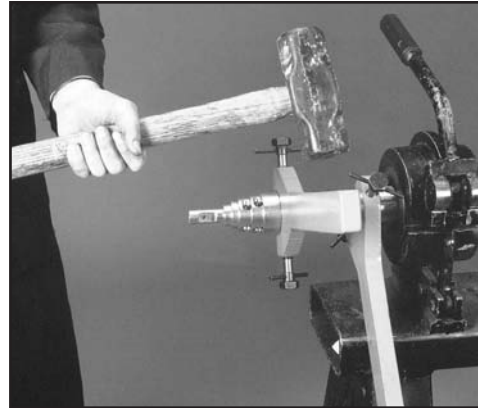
TIGHTEN HEAD ASSEMBLY WITH BLOWS
